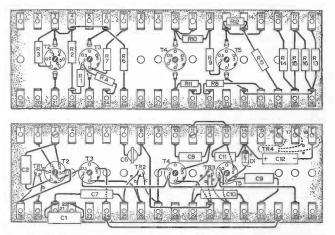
Top—main positive- and negative-line wiring. Note connections of transformer cans to the positive-line. Bottom—remainder of tag board wiring.
